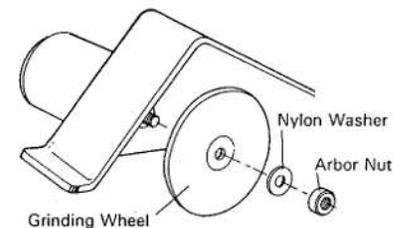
GRINDING WHEEL INSTALLATION.
